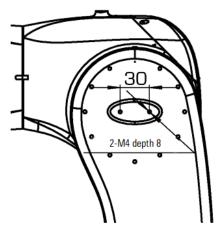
Dimension drawing of AIR8-710A big arm interface
